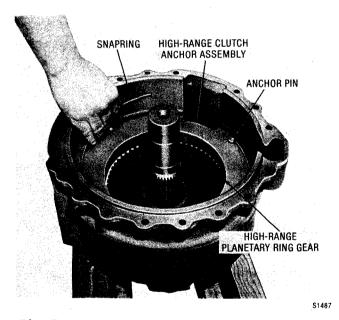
Installing clutch anchor snapring (TRT-3 overdrive)
